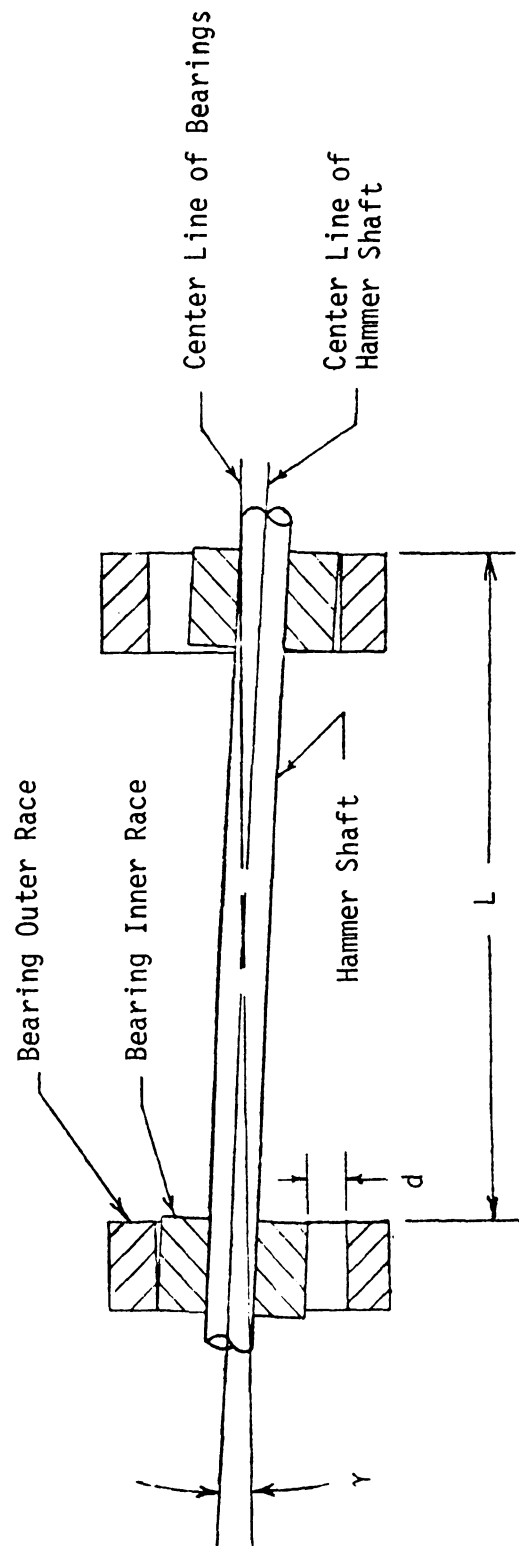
Hammer Shaft Mis-alignment Due to Bearing Clearance
